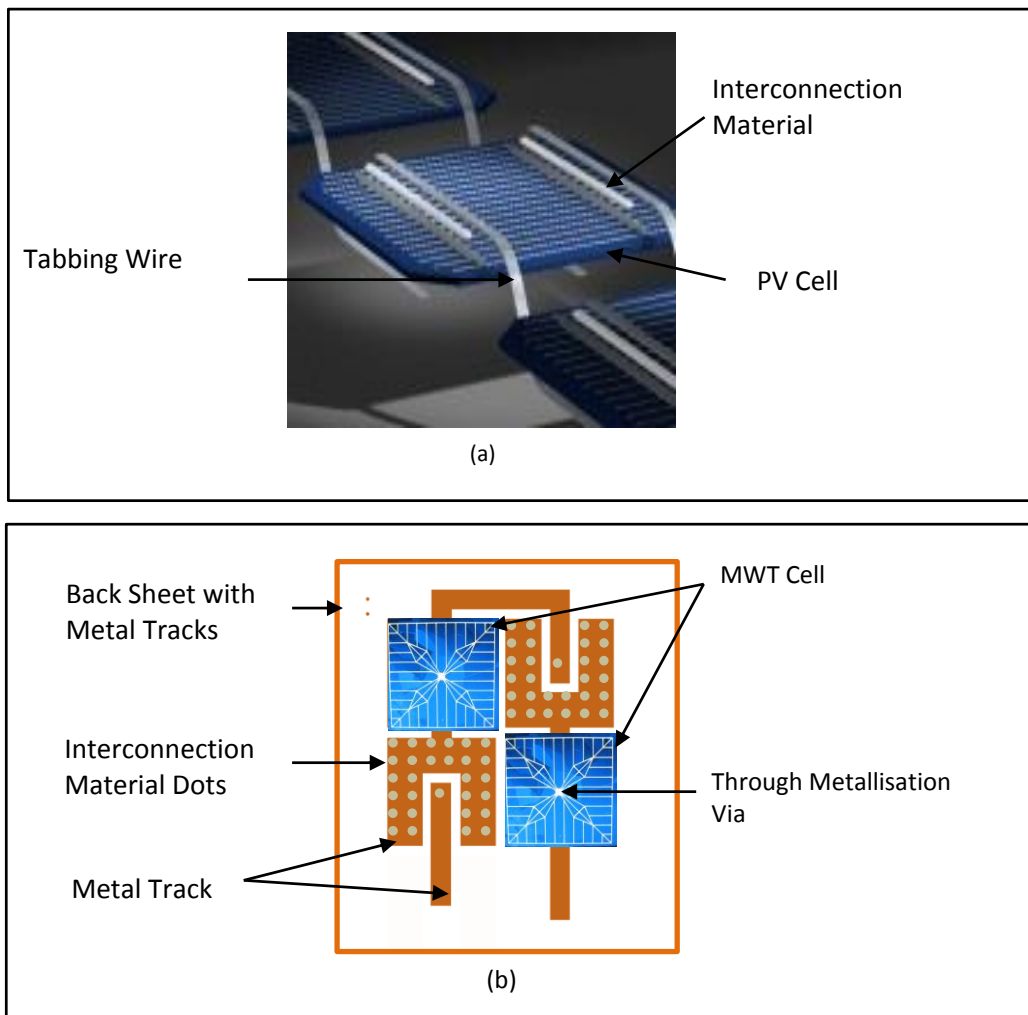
Interconnection in (a) traditional tab string assembly (Henkel 2013) (b) back contact assembly with MWT cell
